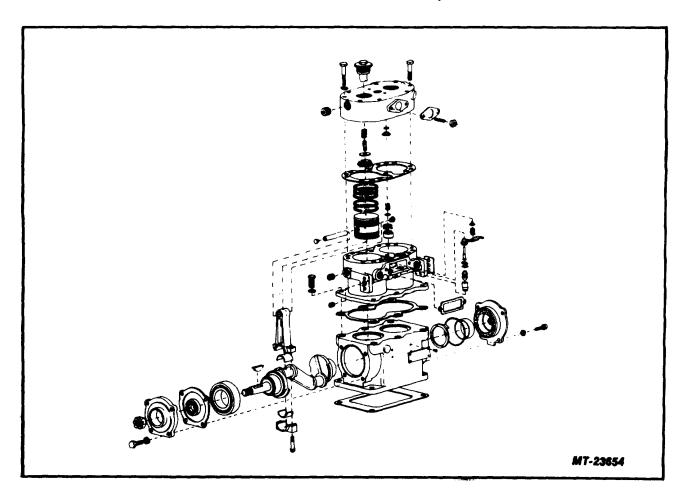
Exploded View of Tu-Flo 700 Air Compressor
